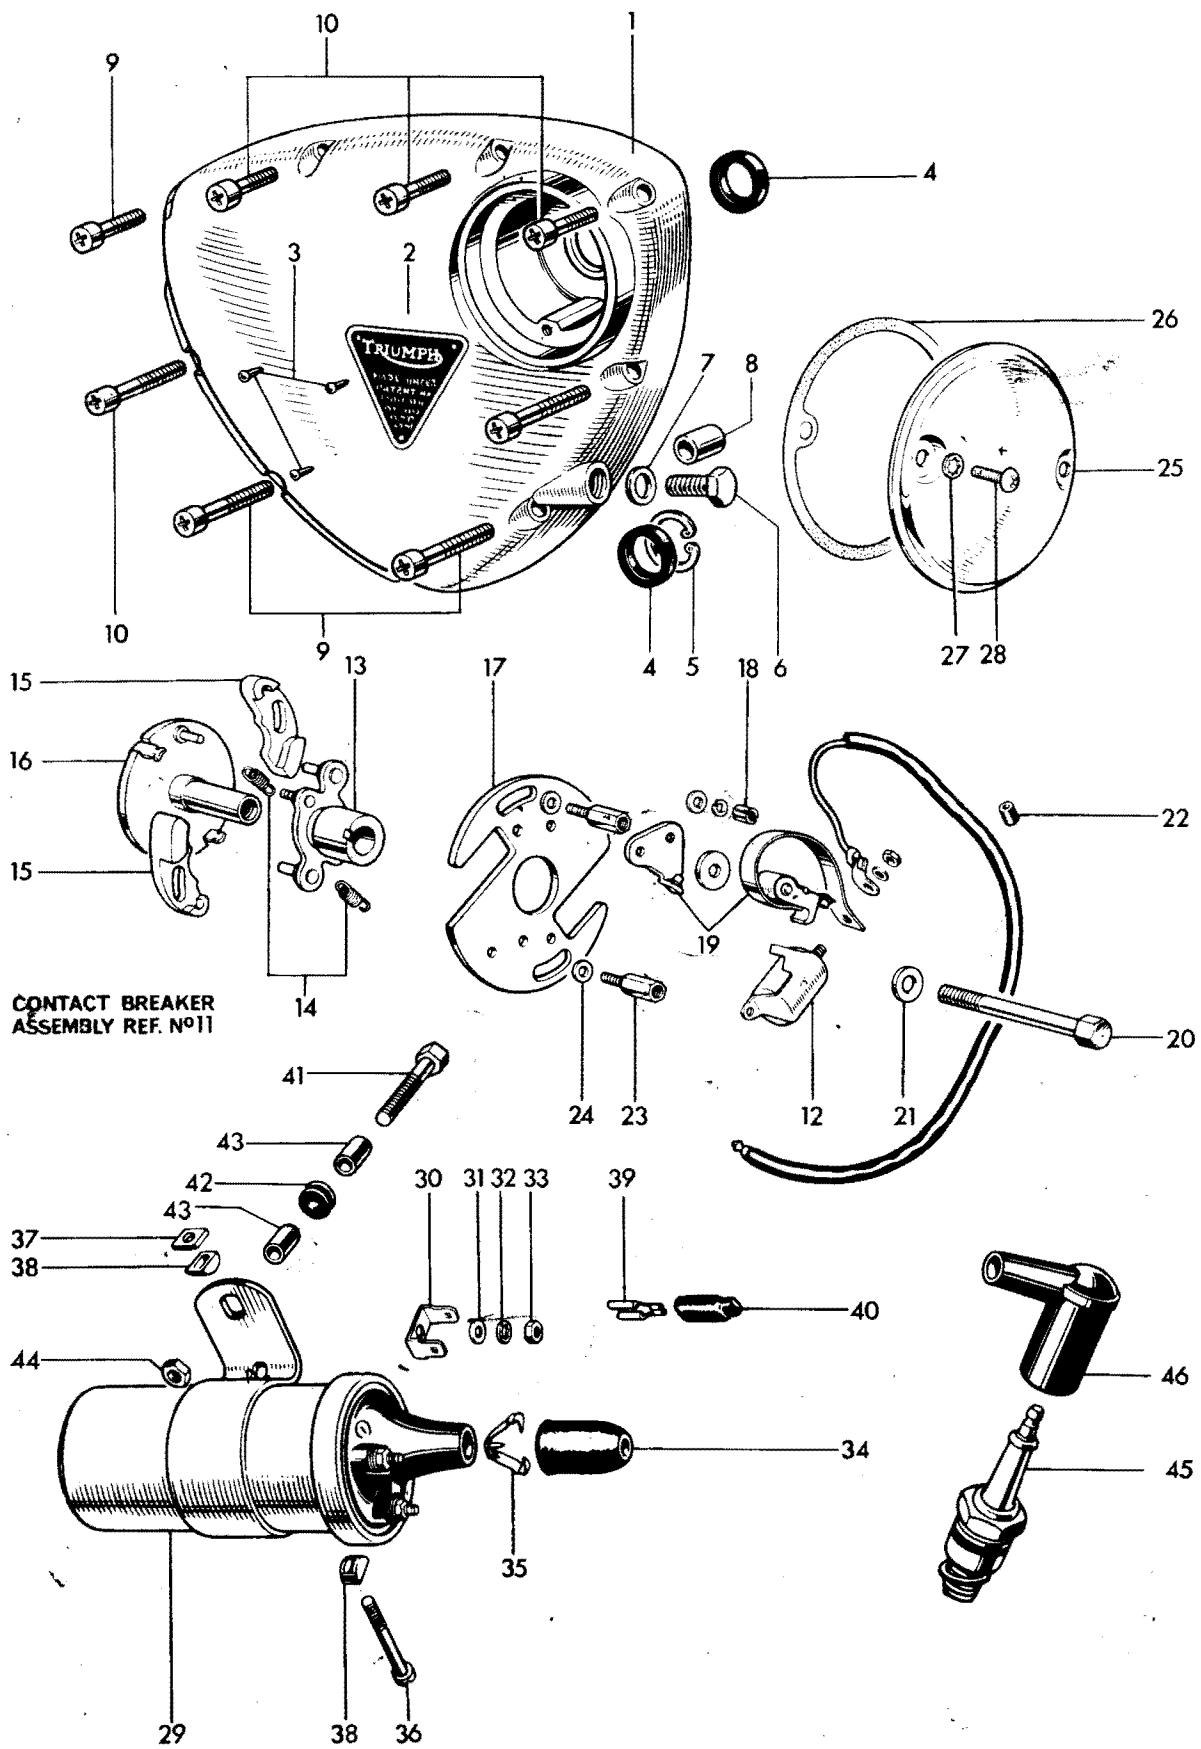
TIMING COVER, CONTACT BREAKER AND COILS
